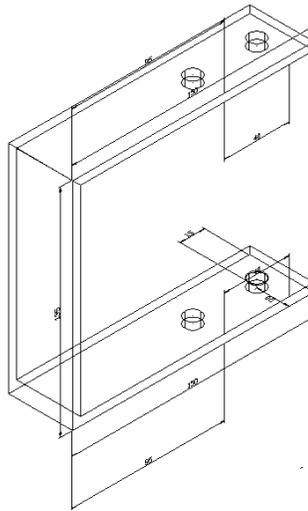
AutoCAD drawing of one HBBB copper connection.
